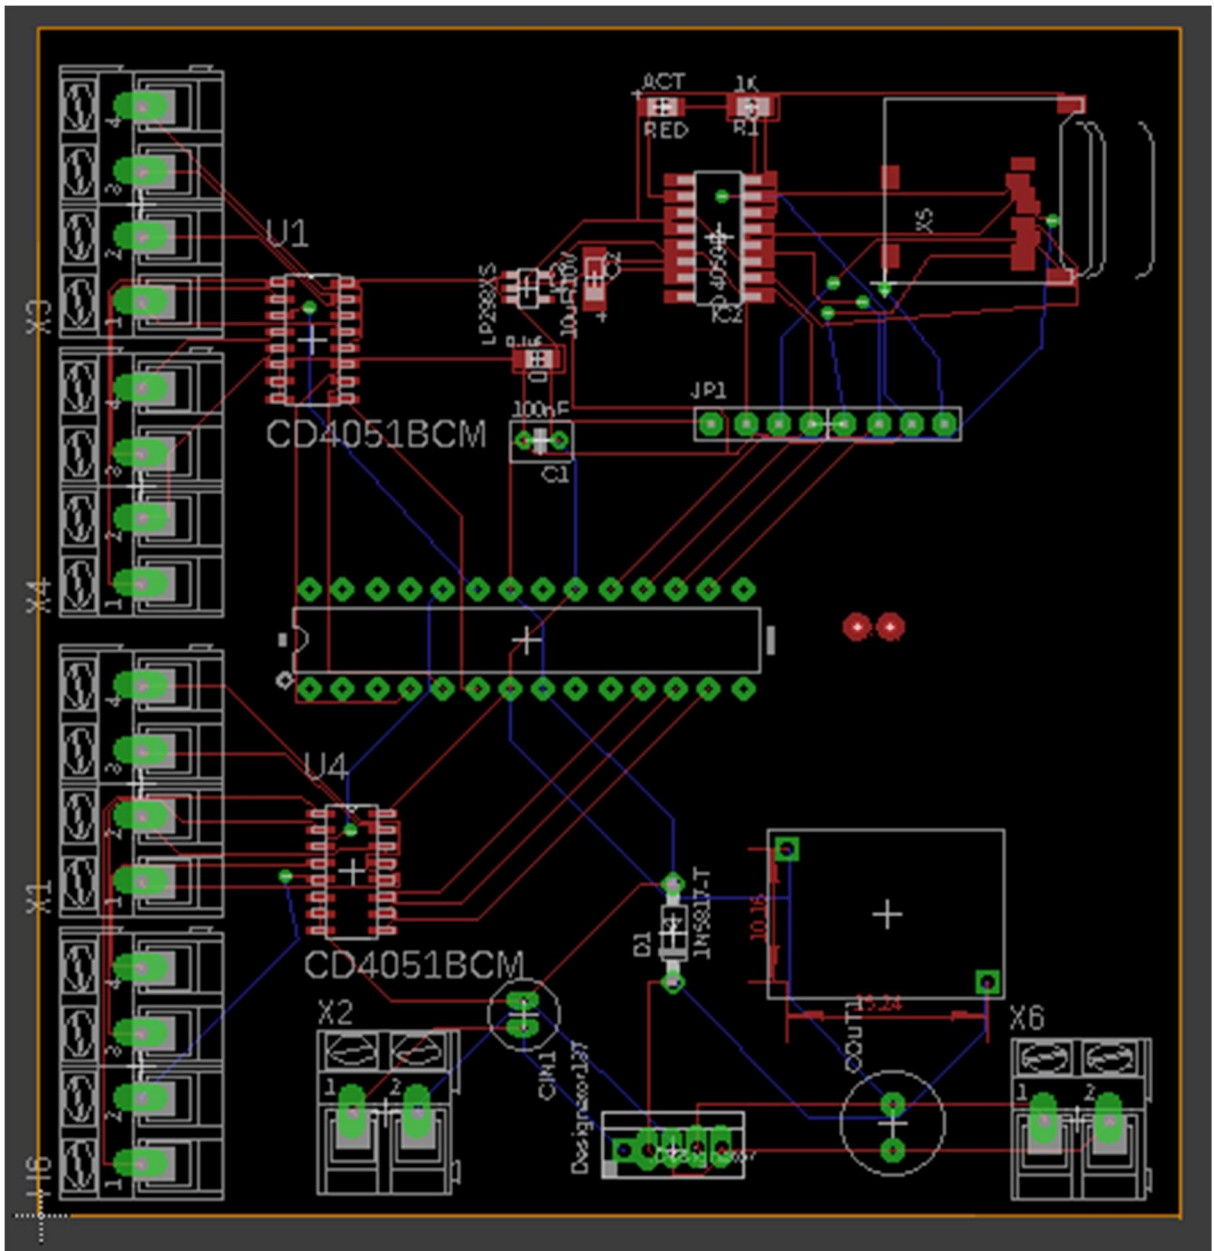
Eagle CAD schematic of Hall Sensor Control Board
